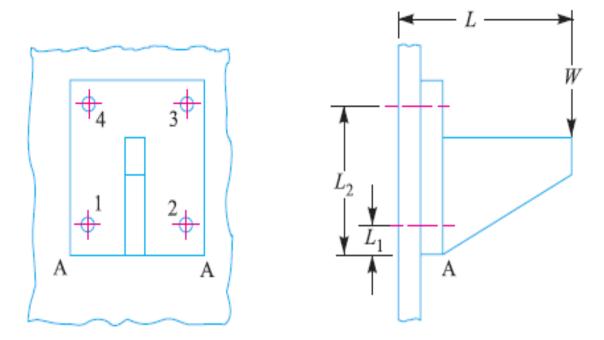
Eccentric load perpendicular to the axis of bolts.
